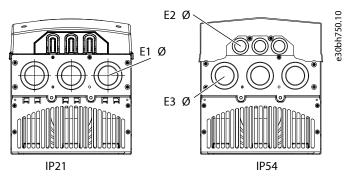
Dimensions of the Mounting Holes for VACON® NXS/NXP AC Drive, FR7
